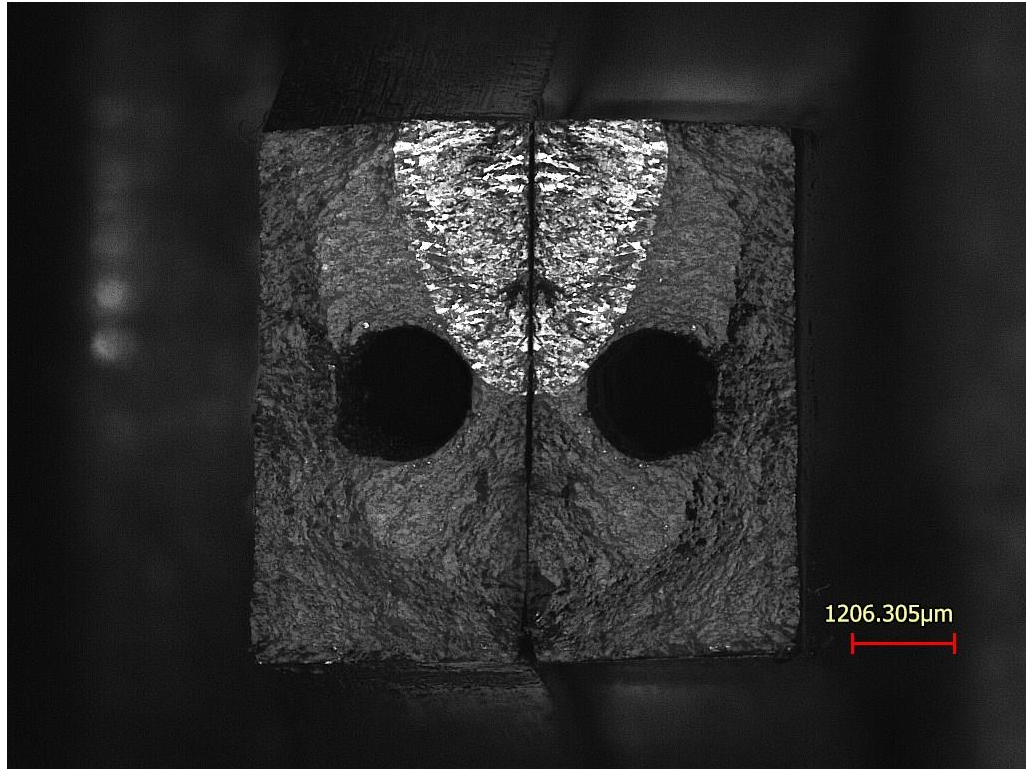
Specimen C2 fracture surface (3,000,000 cycles : 67.49 ksi / 465.3 MPa)
